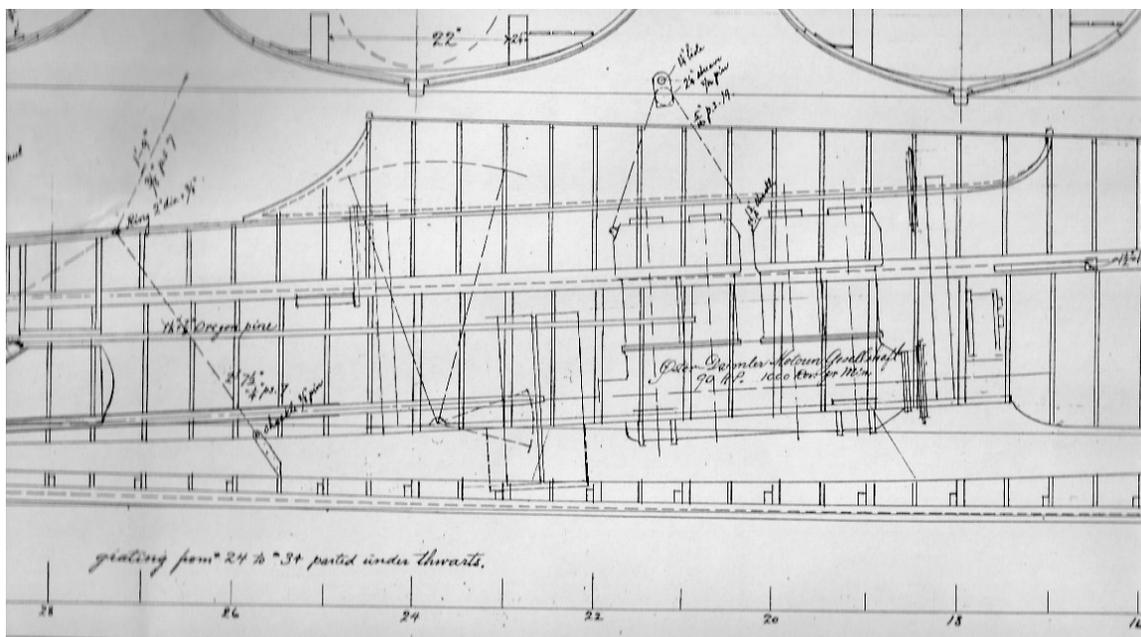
Mechanical Arrangement—HMCo Construction Drawing 001-039 (Courtesy Hart Nautical Collections; MIT Museum)
